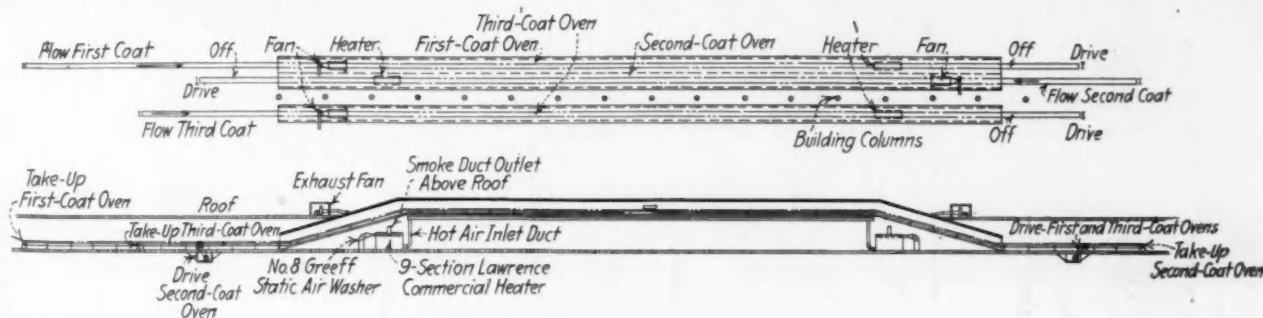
PLAN VIEW AND SIDE ELEVATION OF A RECENTLY CONSTRUCTED BATTERY OF TUNNEL-TYPE OVENS THAT ARE BUILT ON THE ROOF WITH THE ENDS INCLINED TO THE TOP FLOOR
